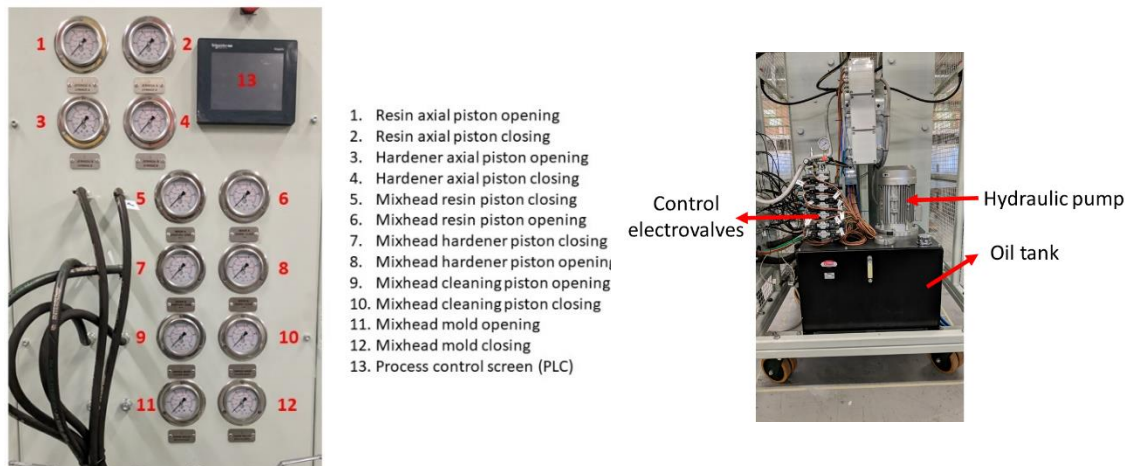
Electro valves system. a) Control panel for lecture of the machine components pressure. b) Hydraulic array and control valves
